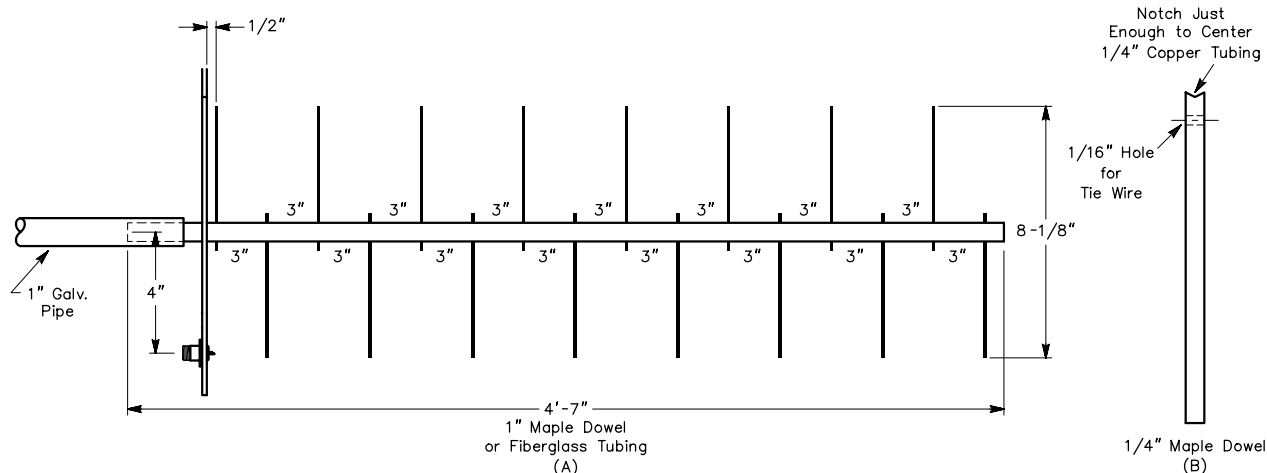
At A, the layout of the portable 435-MHz helix is shown. Spacing between the first 5-inch winding-support dowel and the ground plane is 1/2 inch; all other dowels are spaced 3 inches apart. At B, the detail of notching the winding-support dowels to accept the tubing is shown. As indicated, drill a 1/16-inch hole below the notch for a piece of small wire to hold the tubing in place.
